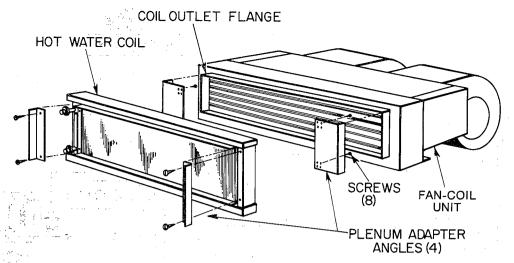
Attaching the Hot Water Coil to the 513A-030 and -036
